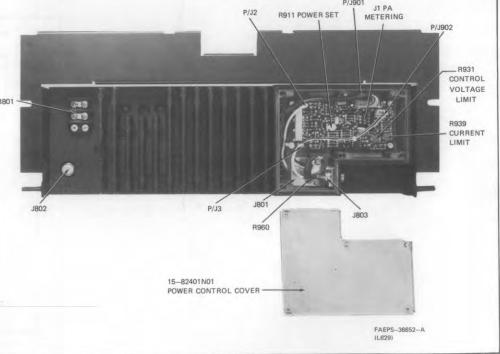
PA Deck (Power Control Board) Adjustment Location Detail
